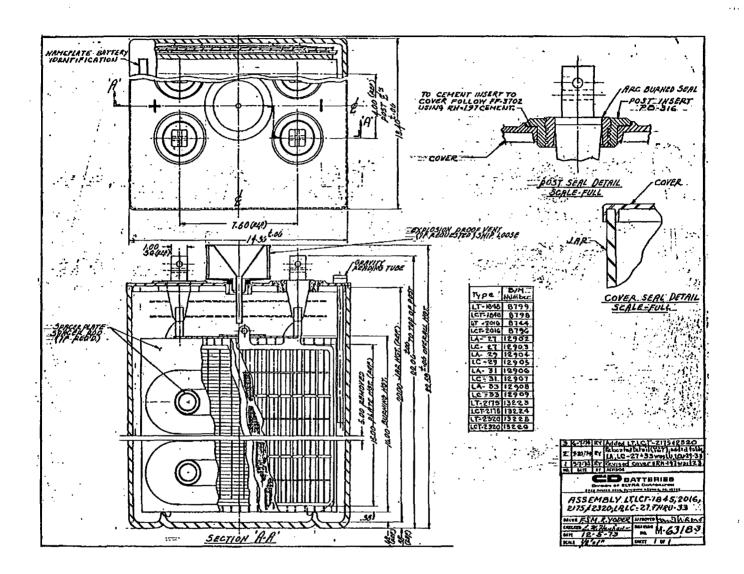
Construction Details for Types LO-29 and CT-1440
